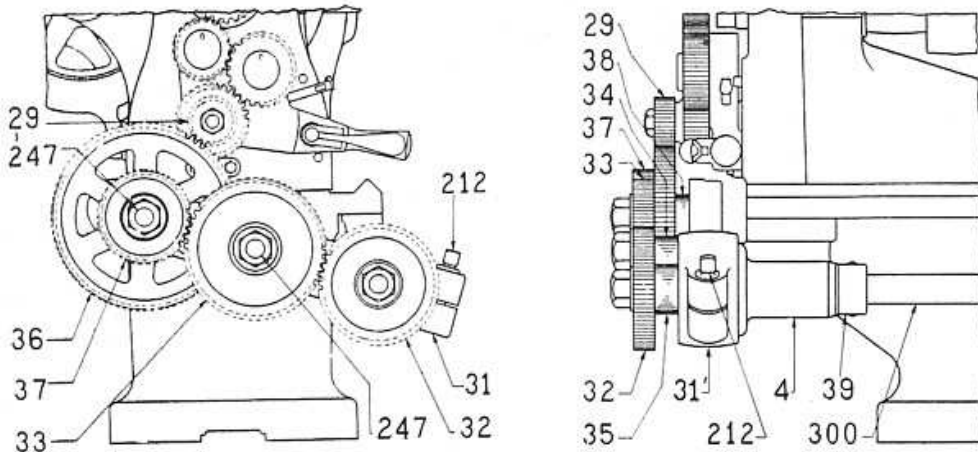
Line Drawing of Standard Change Gear Unit Showing Position of Parts in Assembly. All Parts are Listed and Priced on the Preceding Page.
